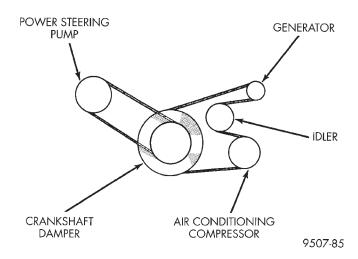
Accessory Drive Belt Routing—2.5L Engine
